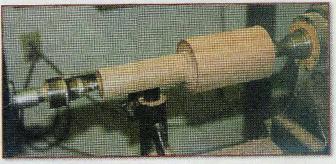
The blank is all blocked out. All the excess material has been removed from the blank and it is now ready for the details.
